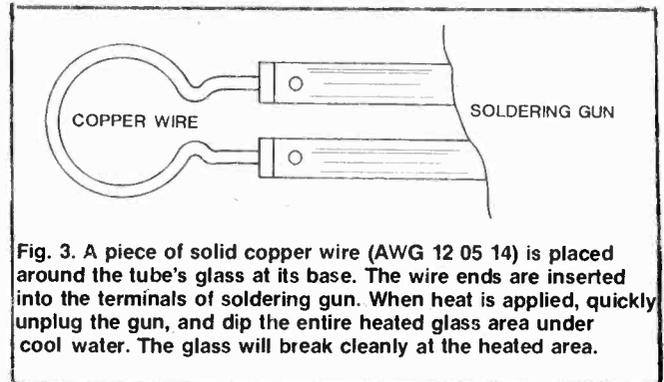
A piece of solid copper wire (AWG 12 05 14) is placed around the tube's glass at its base. The wire ends are inserted into the terminals of soldering gun. When heat is applied, quickly unplug the gun, and dip the entire heated glass area under cool water. The glass will break cleanly at the heated area.
